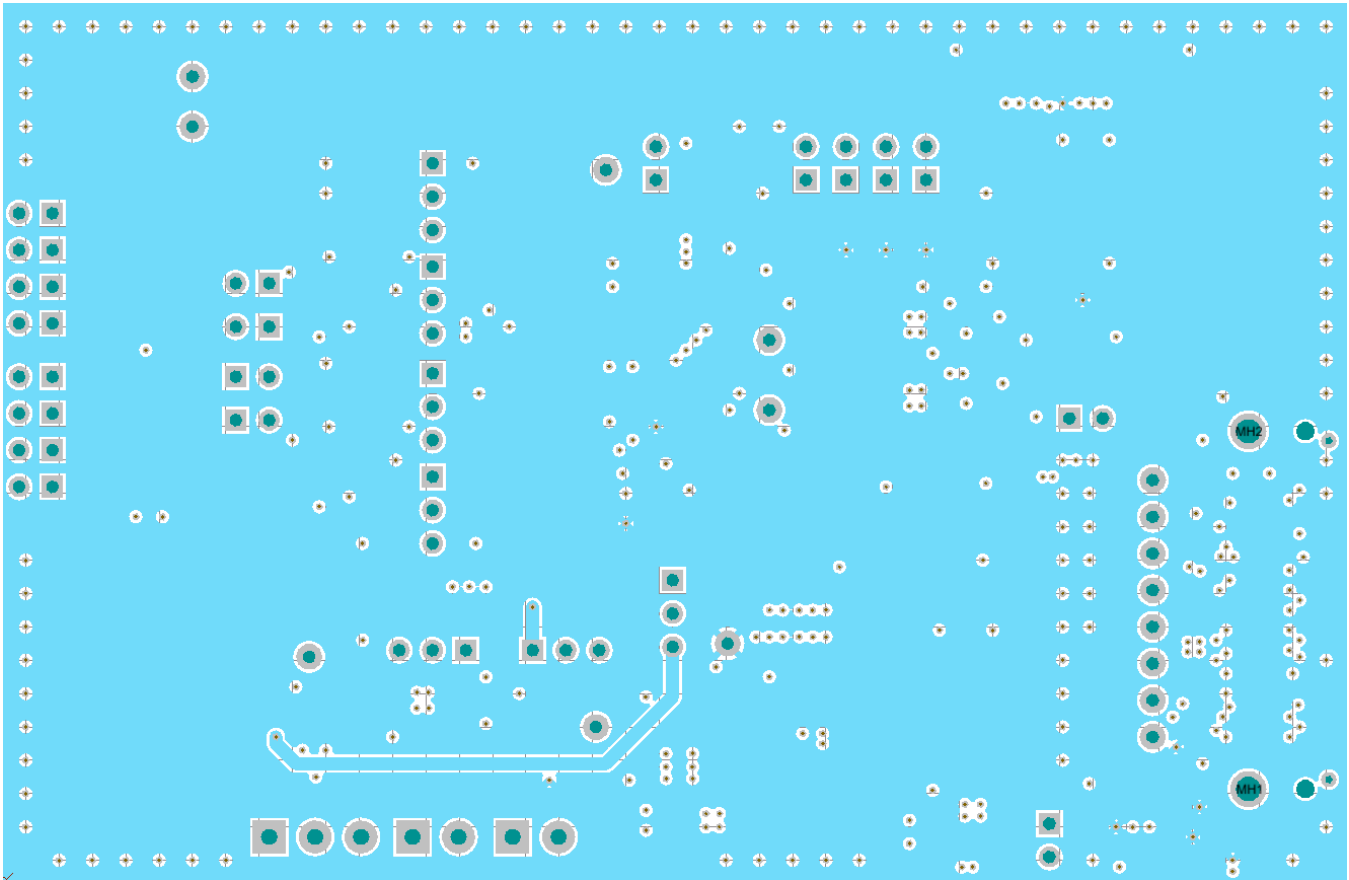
ADS8688EVM PCB: Top Layer (L1)
